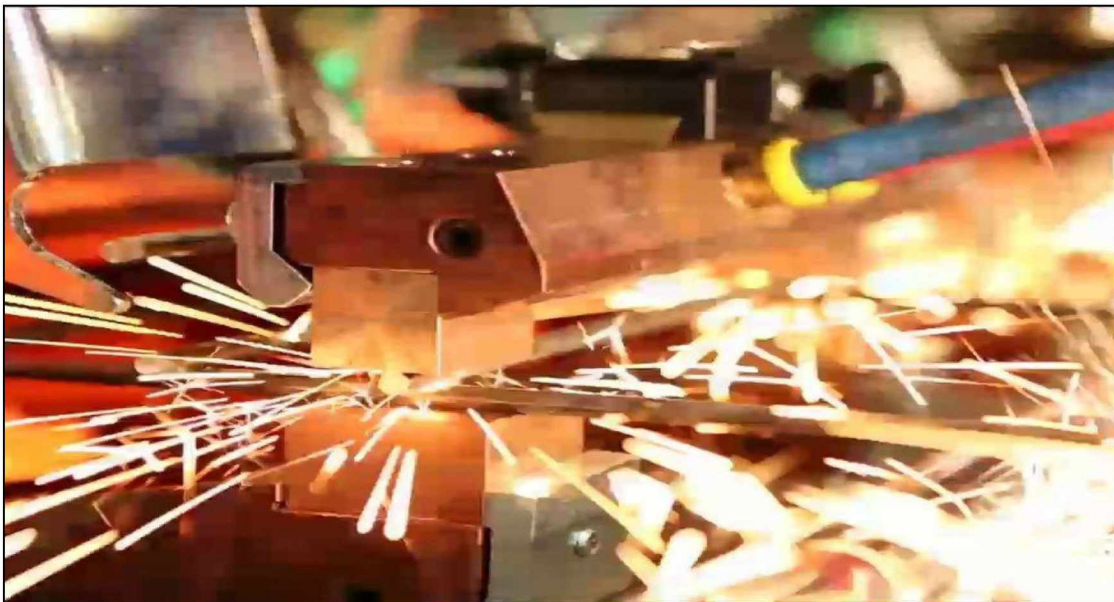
Longitudinal and Transverse Wire Welding (Schnell 2015)
